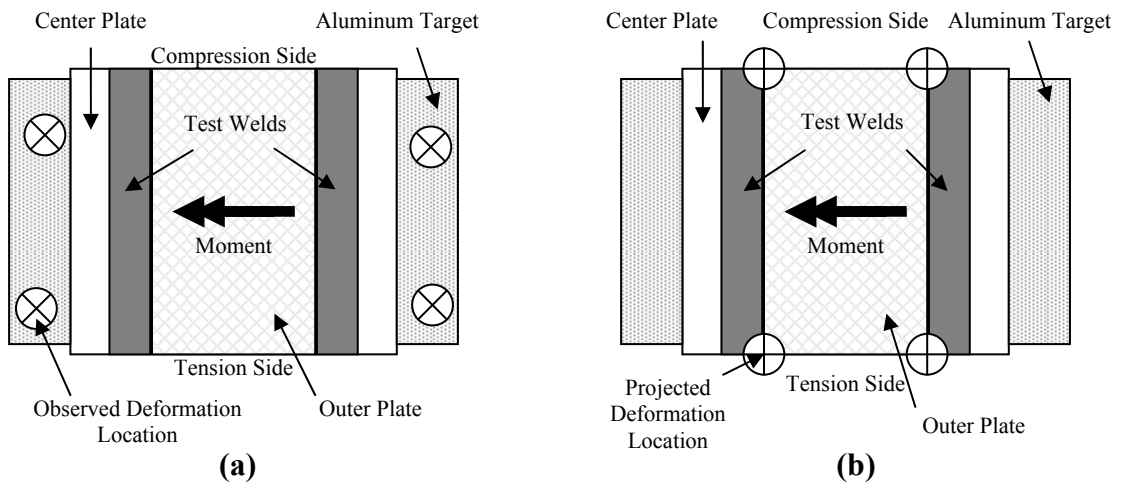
A side view of the test setup (as photographed in Figure 4.3) indicating (a) the observed weld deformation location and (b) the kinematically projected weld deformation location
